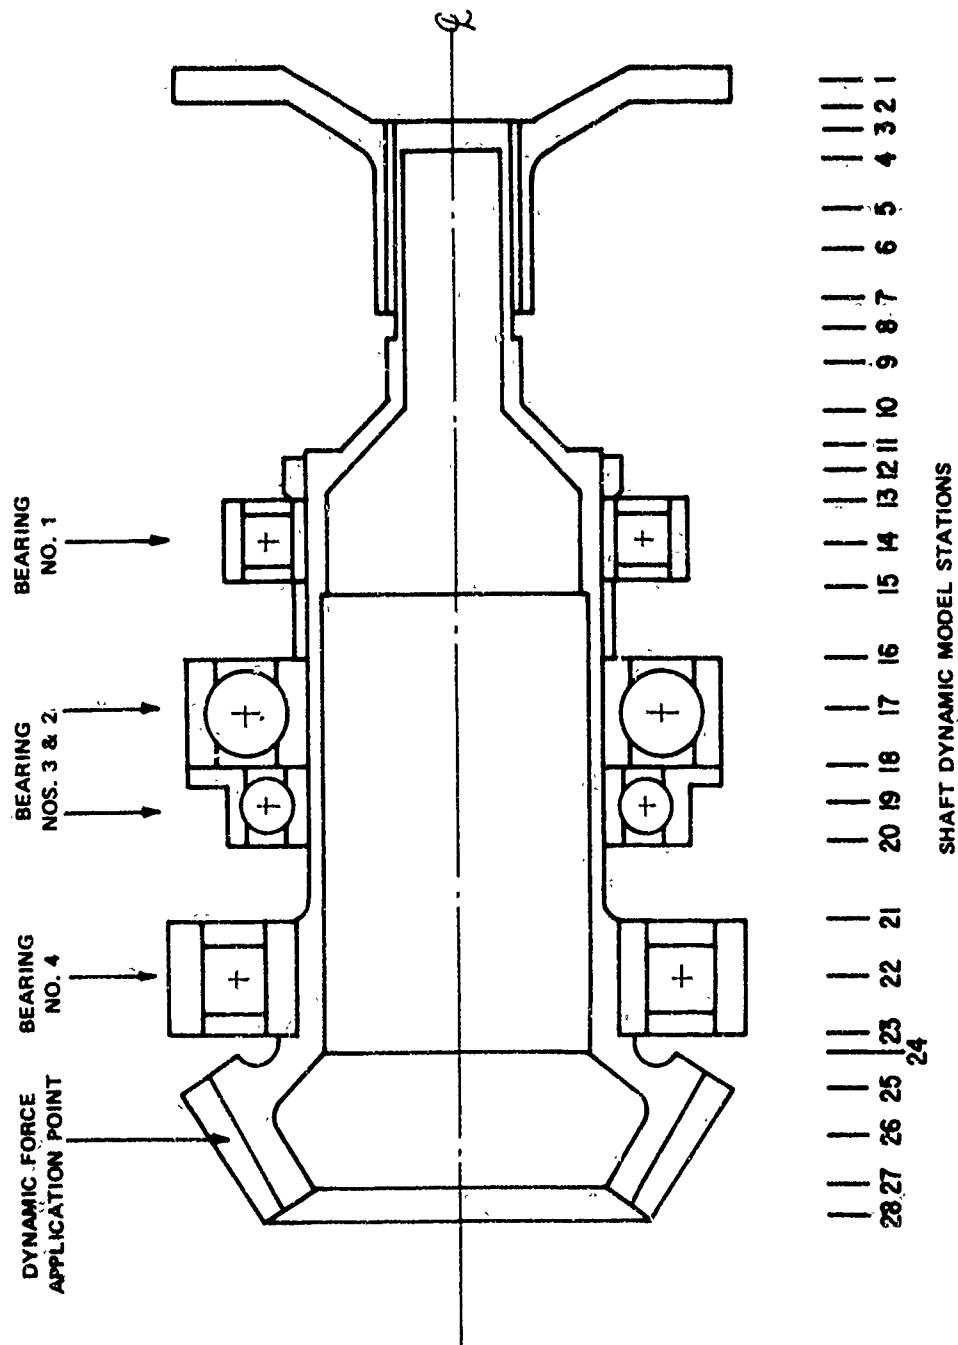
CH-47 Input Bevel Gear Shaft Dynamic Modeling Details.
